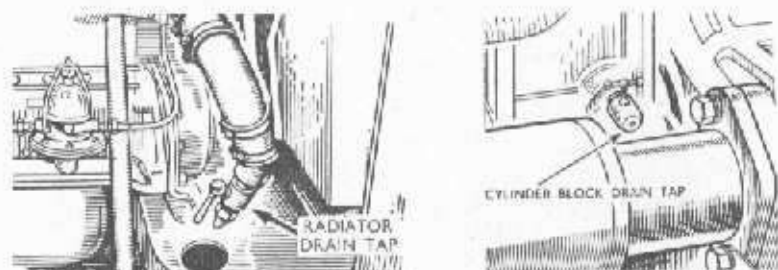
Cooling system drain taps. The cylinder block drain tap is at the rear end of the engine on the left-hand side and is accessible through an inspection door inside the cab.
